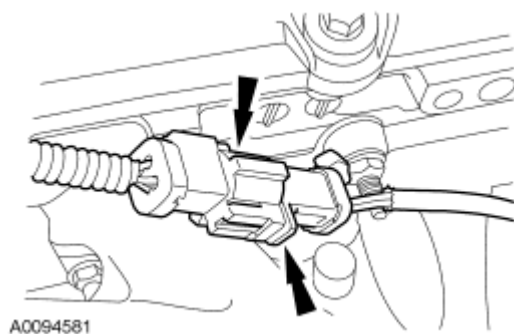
Locating Heated Oxygen Sensor (HO2S) Electrical Connector & Wiring Retainer
